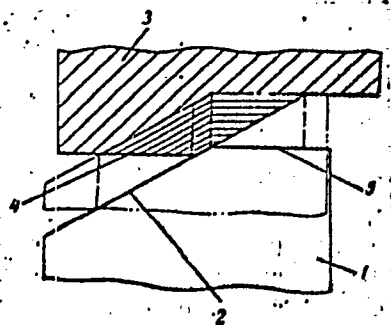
1 - tool bit; 2 - first cutting blade; 3 - product; 4 - zone of outer layer removal; 5 - second cutting blade
